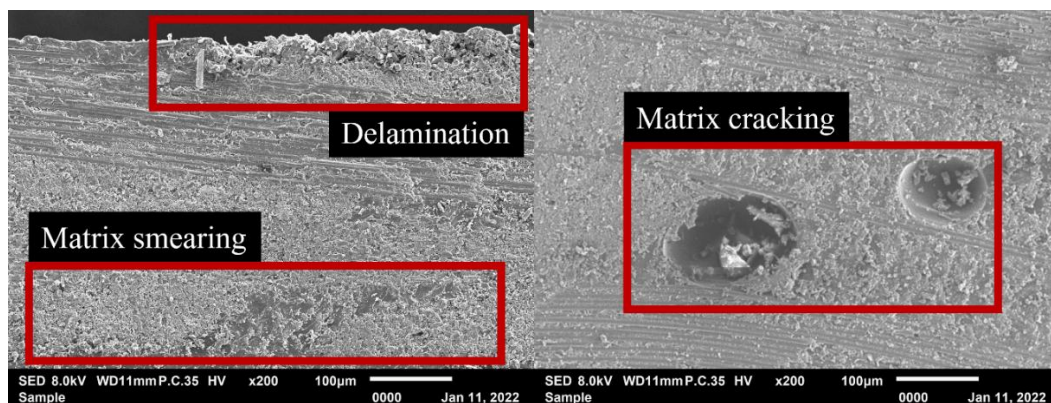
SEM images of delamination, matrix smearing and matrix cracking on CFRP machined surface in dry condition after 6000 mm machining length for cutting speed 150 m/min
